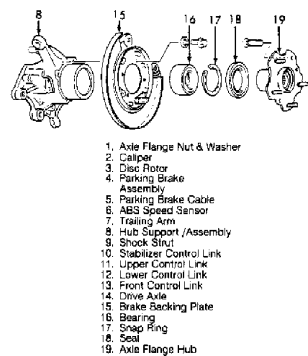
Exploded View Of Rear Hub Assembly (929) (2 of 2)
